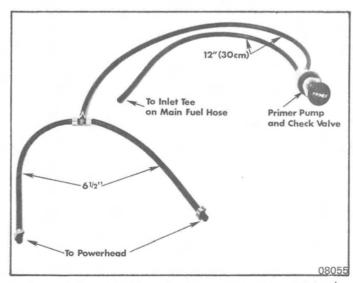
Mark II (Chassis Serial No. 3591478 and Below)
